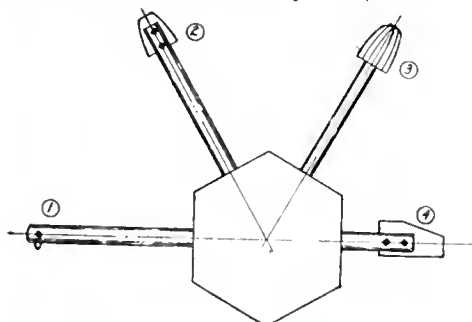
ARRANGEMENT OF BORING TOOLS IN LATHE TURRET FOR MACHINING 60 PDR. SHELLS.
